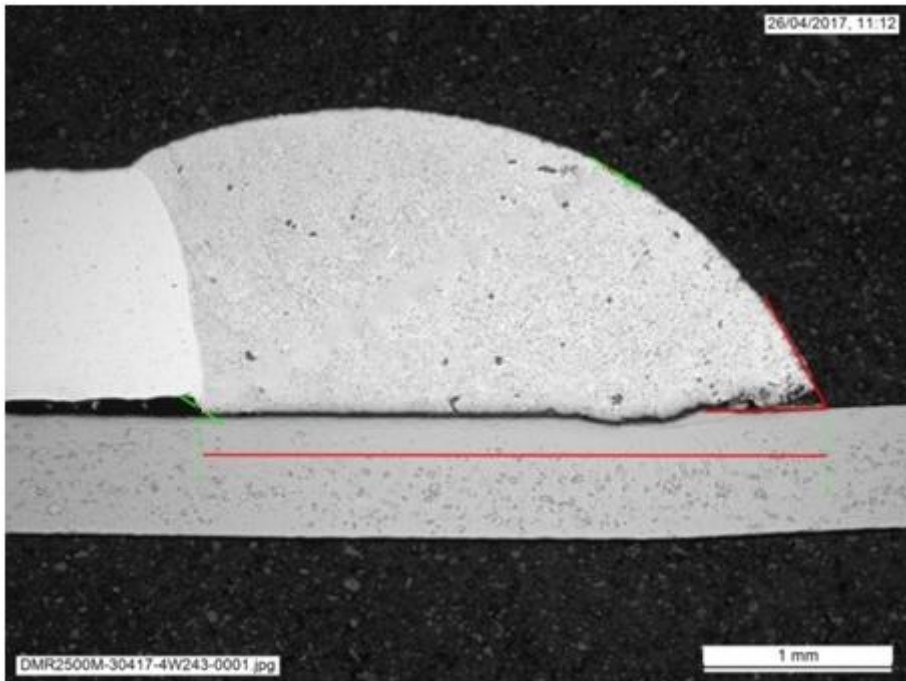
Cross-section of A4 (GA, 1.6mm ZnAl15 Filler wire)
